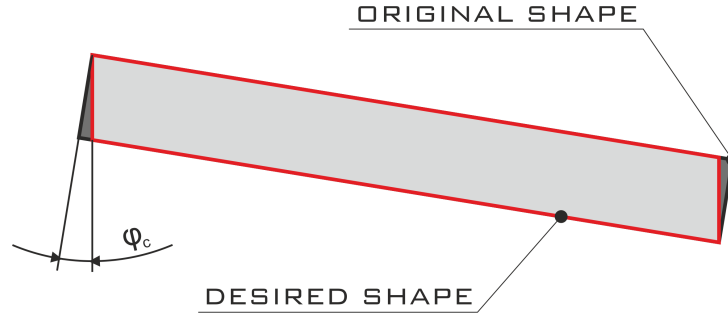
definition of chamfer angle on spar and slat parts (top view)
